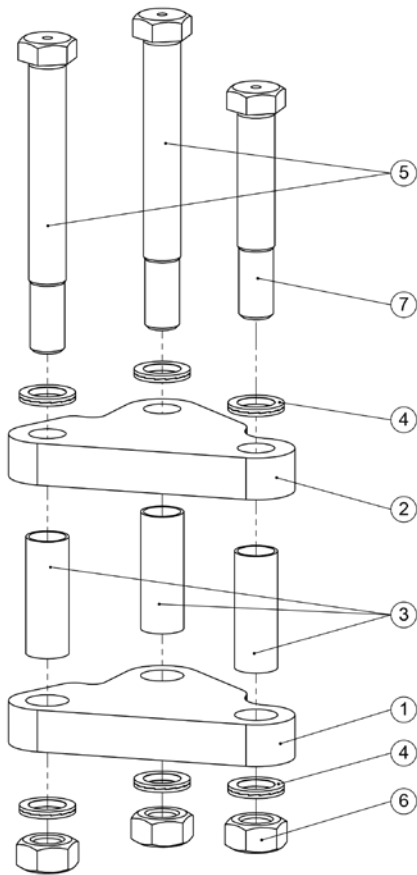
648253 Latch Mechanism Assembly for AMP®-500/2
